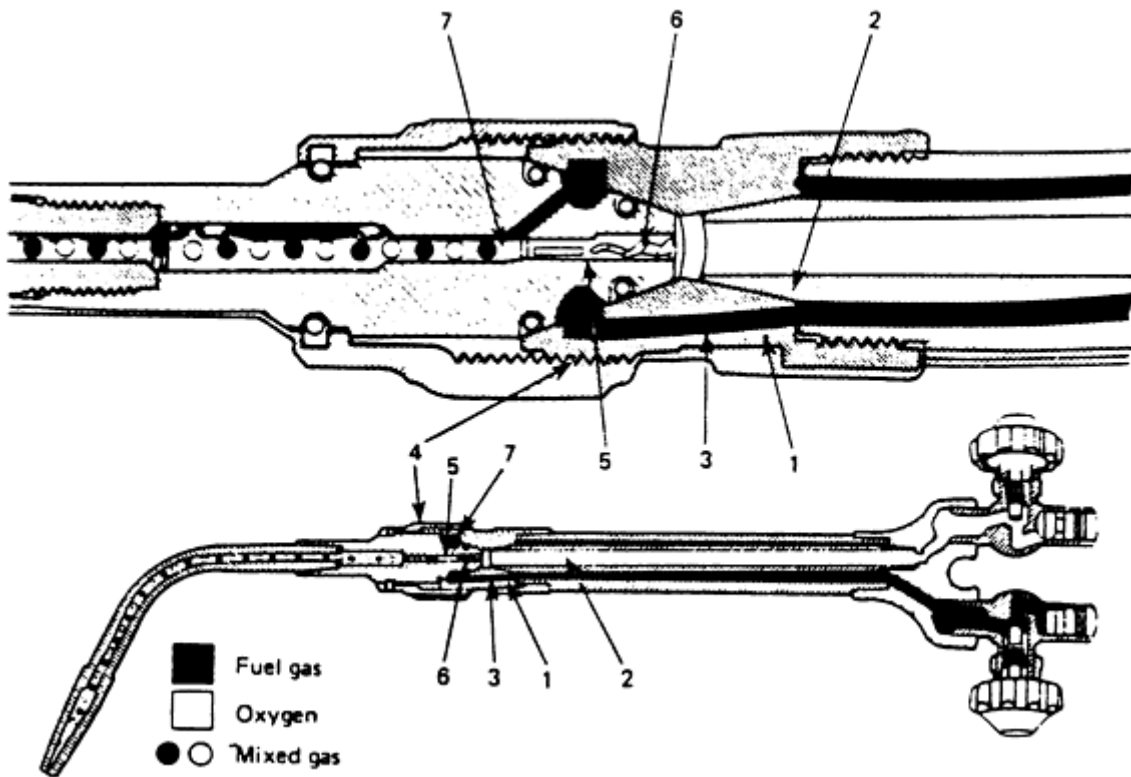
SCHEMATIC SHOWING CROSS-SECTIONAL VIEW OF A SPIRAL EQUAL-PRESSURE MIXER. (1) WELDING TORCH HEAD. (2) OXYGEN TUBE FROM TORCH HEAD. (3) ACETYLENE (FUEL GAS) PASSAGES FROM TORCH HEAD. (4) NOZZLE NUT. (5) WELDING NOZZLE CONE END. (6) SPIRAL IN WELDING NOZZLE. (7) MIXER ORIFICE AND MIXING CHAMBER
